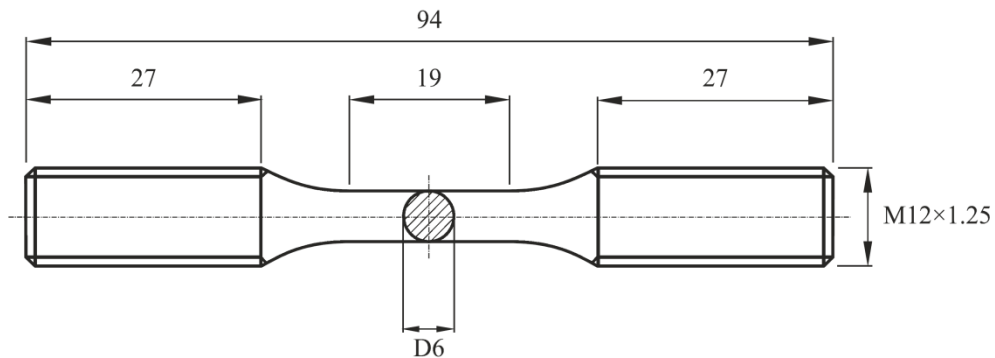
Low-cycle fatigue specimen's dimensions.
